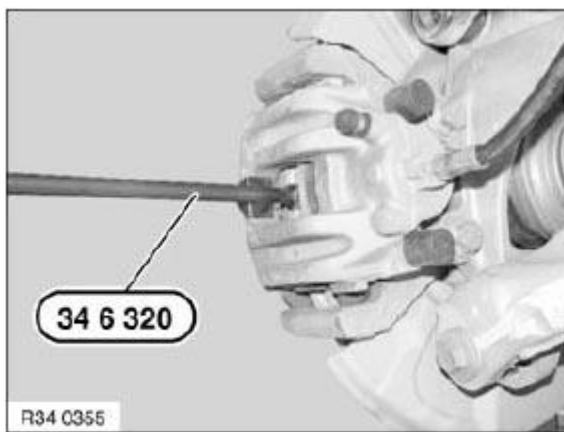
Pressing Back Brake Pads And Piston With Special Tool 34 6 320
